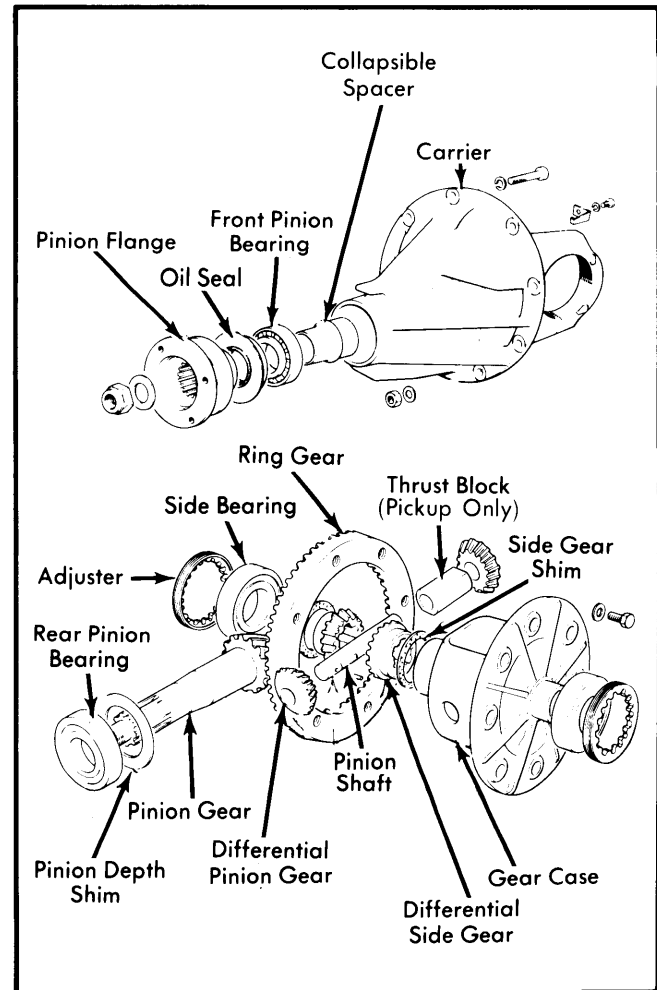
Exploded View of Mazda Rear Axle Assembly
